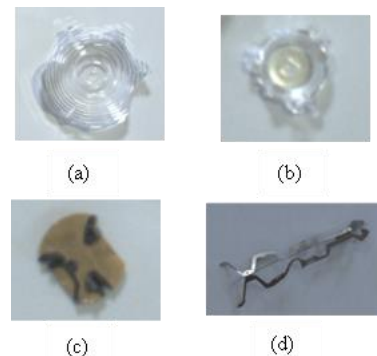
Pieces of the industrial product to be assembled: (a) primary lens, (b) secondary lens, (c) solar-cell, (d) tripod-leg
